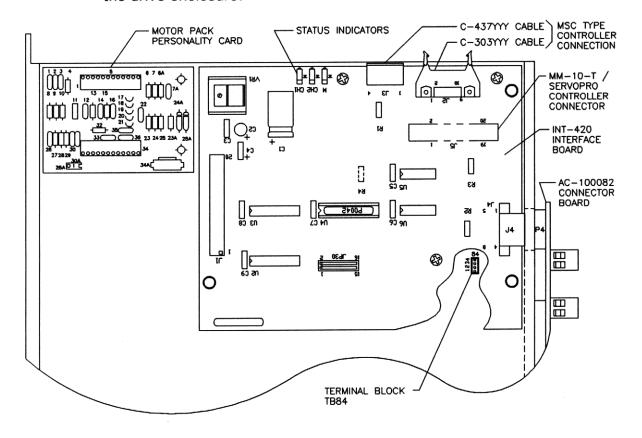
Drive: Partial Side View (Cover Removed)
